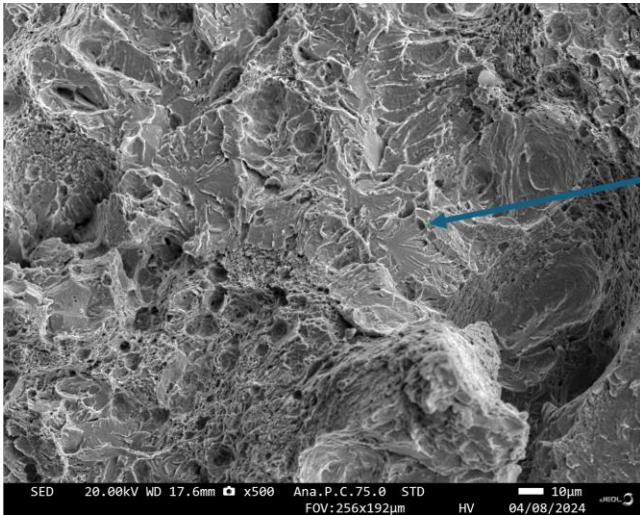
Fracture surface bolt B center, ductile and brittle surface, shown dimples and cleavage fracture.
